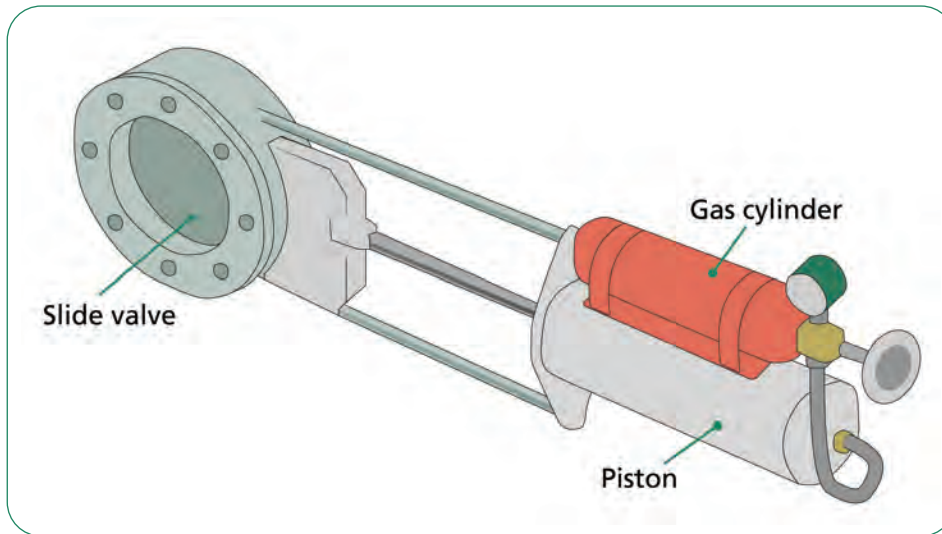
A gas-powered slide valve to seal pipework shut¹⁷
